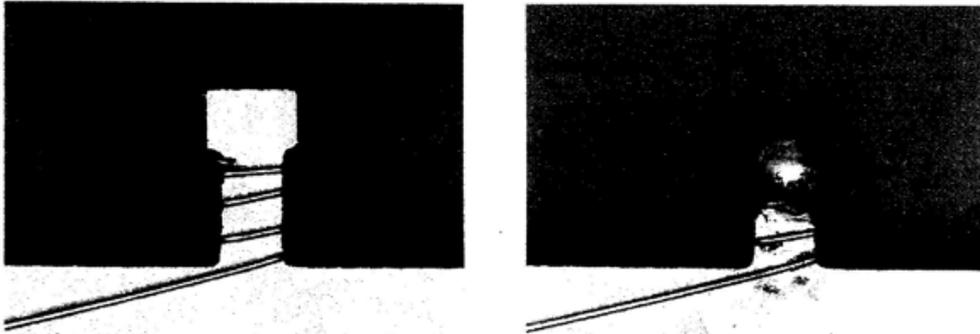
Example of TIG welded joint (Material: ϕ 0.15 coil (SF-FLW)/0.5 mm thick copper terminal).
